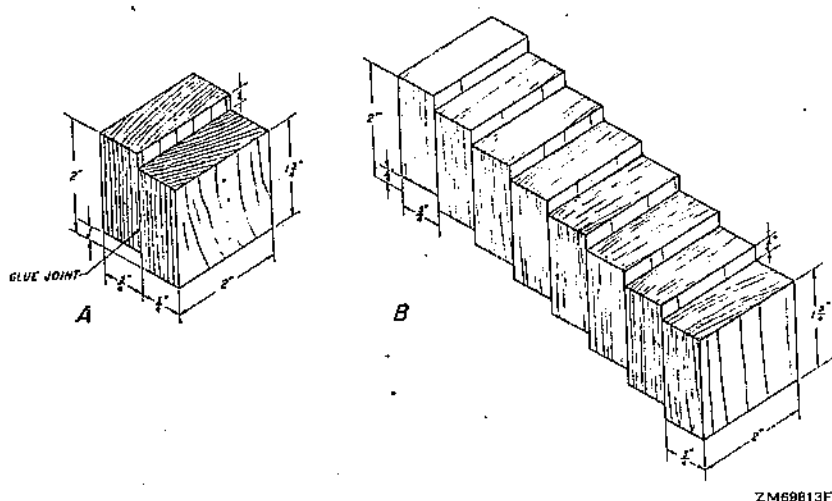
Standard block (A) and stair-step type (B) shear specimens for testing glue-joint strength.
